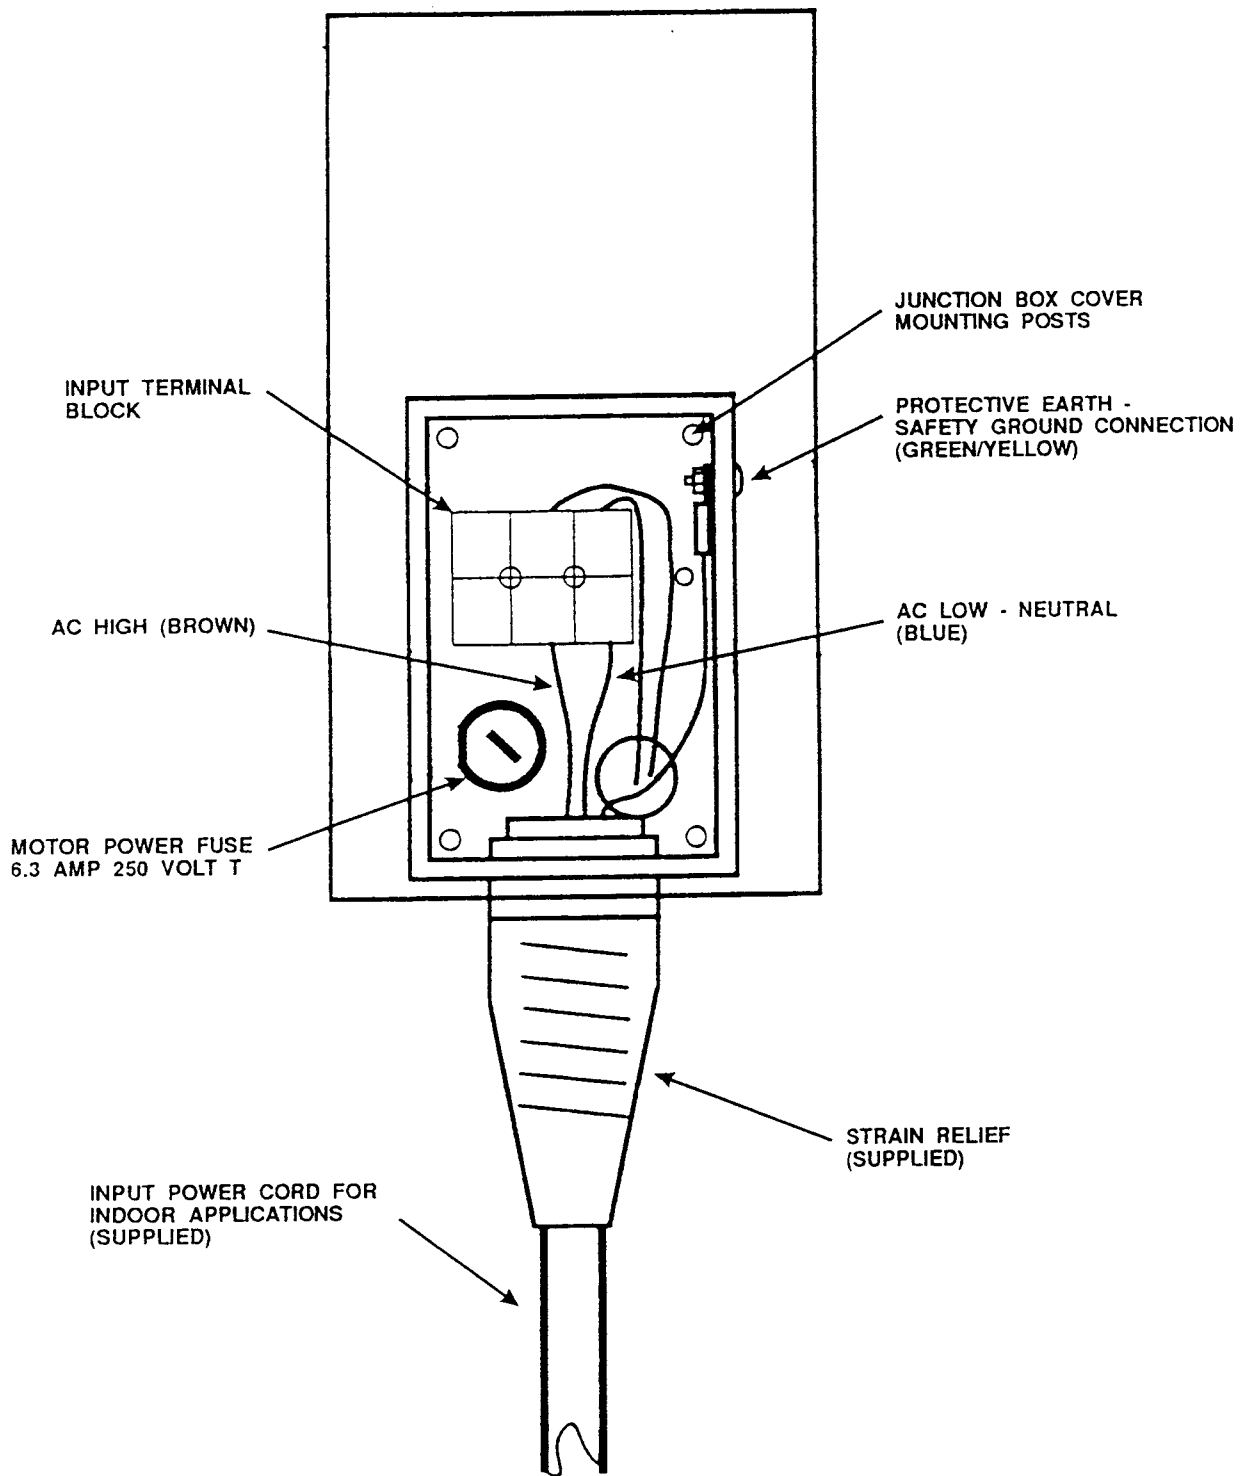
MODEL 1070 SERIES INPUT POWER ASSEMBLY
